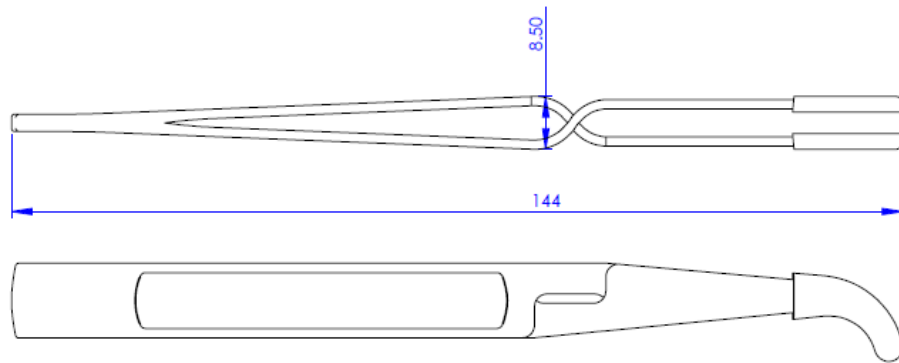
Diagram and dimensions of the SWITCH - Induction Cup Tweezers. All dimensions are in mm.
